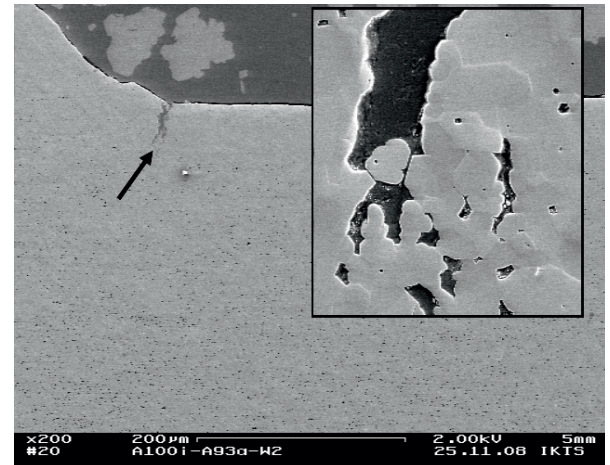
SEM image of bottom at gear tooth with alumina as inner component
